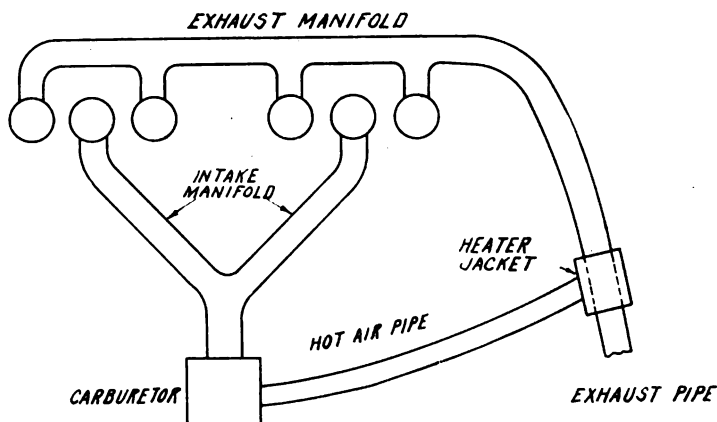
Conventional method of supplying heated air to a carburetor.
